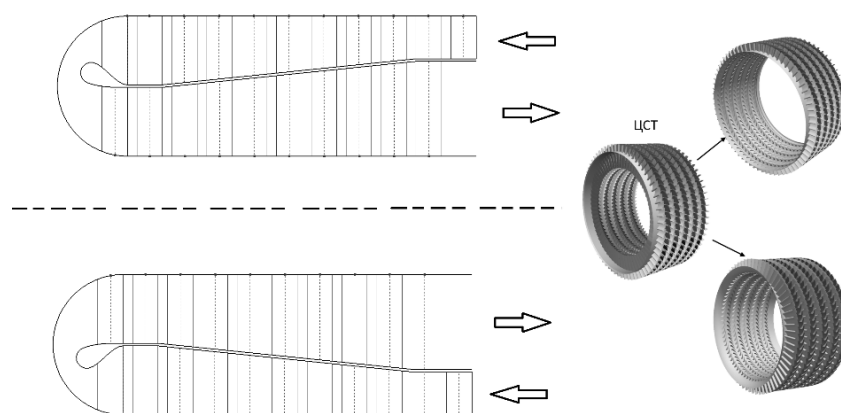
Medium pressure cylinder of loop-type steam turbine
